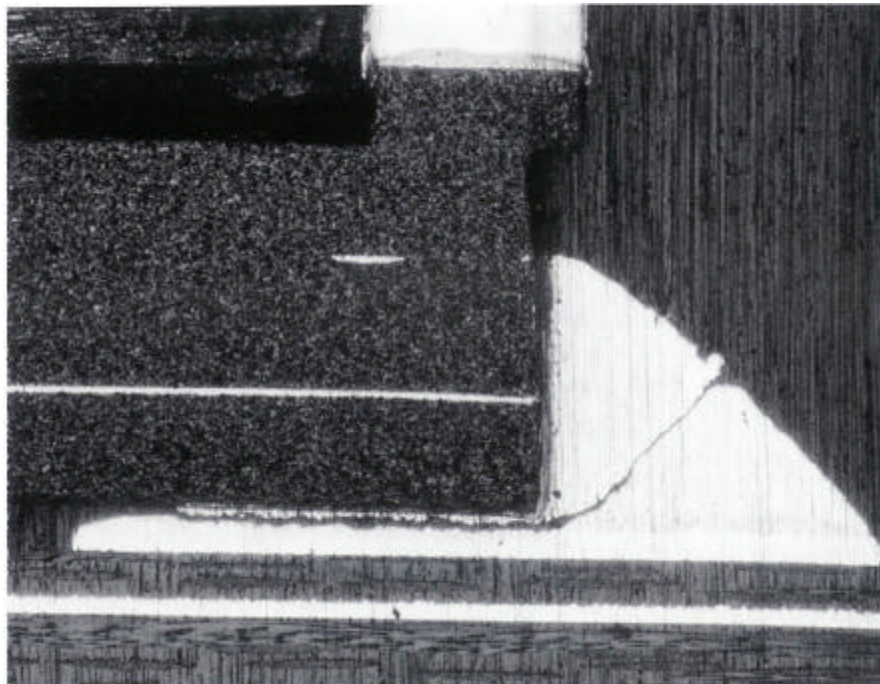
Cross-section of cracked solder joint of the ceramic oscillator
